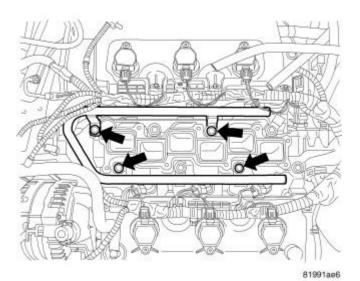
Identifying Fuel Rail Bolts Courtesy of CHRYSLER LLC
